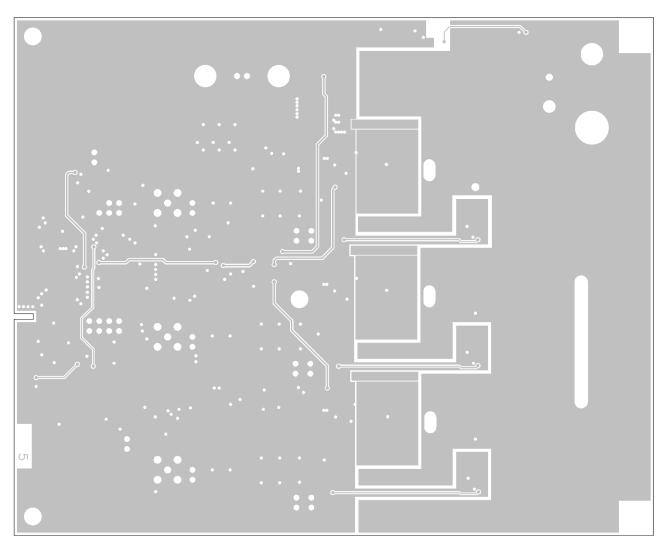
EPC7C021/EPC7011L7 3-Phase Motor Driver Eval. Board Inner Layer 4 Copper Etch (1 oz).
